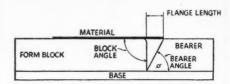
Drawing illustrating bearer block technique for control of wrinkles.
